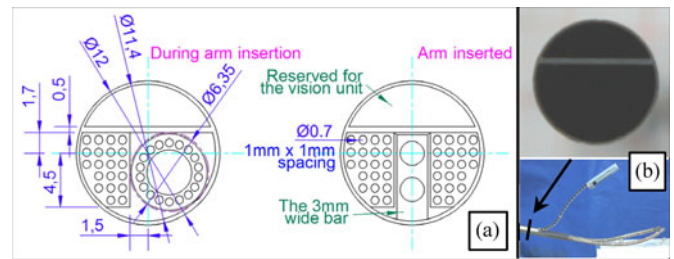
Layout of the stem cross section: (a) CAD model and (b) prototype.
